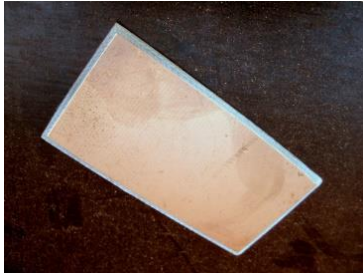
cut to size double sided PCB with chamfered edges to deter high voltage tracking over. Fibreglass board is a necessity
